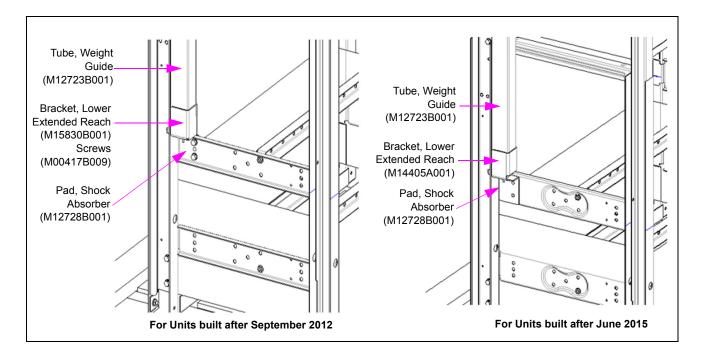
Upper Retriever Assembly (For Gen 2 and Gen 3 Units)
